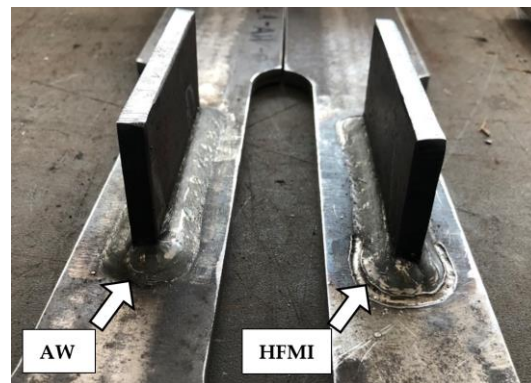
Untreated weld toe—AW (left) and treated weld toe—HFMI (right) on the specimen with longitudinal attachment.
